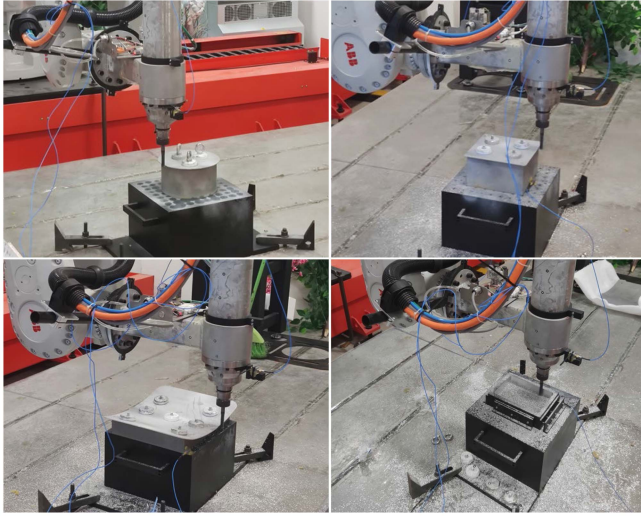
Robot equipped with machining spindle is used to perform machining task.
